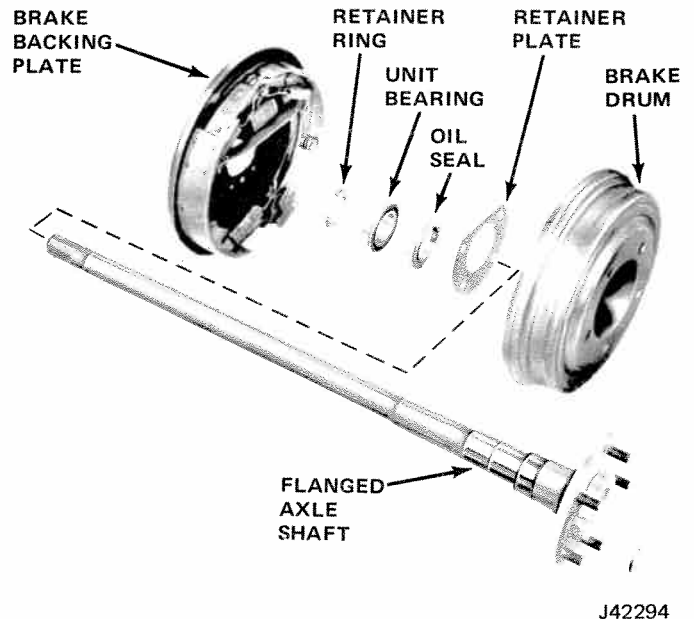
Rear Wheel Attaching Parts - Flanged Axle
